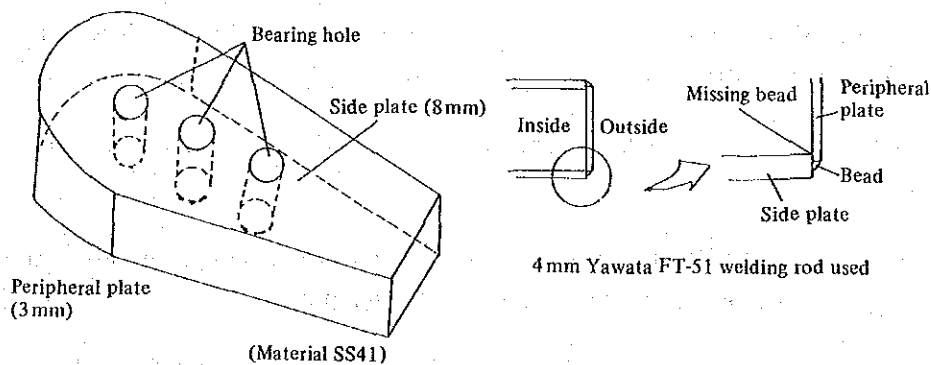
Sketch of the gear housing and welded part
